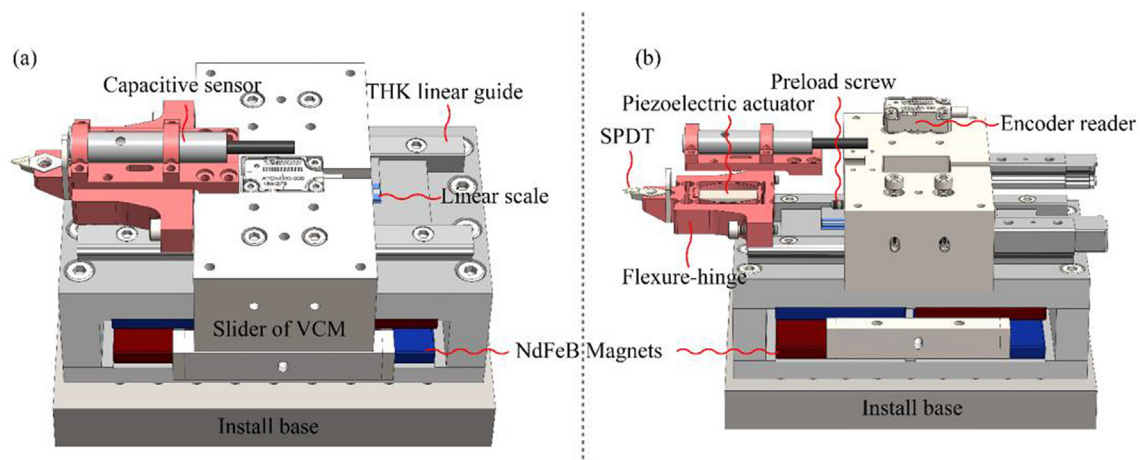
Assembly view (a) and exploded view (b) of the device.
